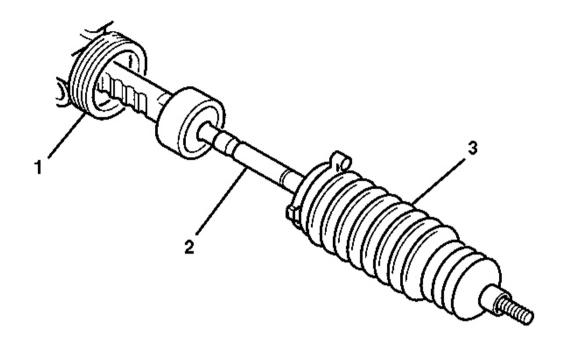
Inner Tie Rod, Rack And Pinion Gear & Rack And Pinion Boot Courtesy of GENERAL MOTORS CORP.
